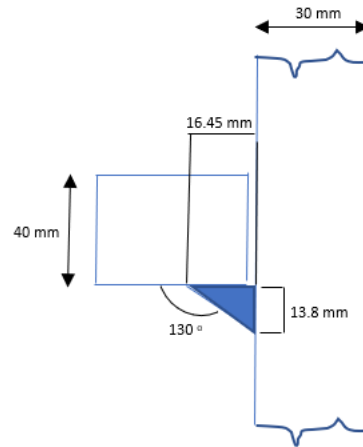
Weld geometry for a 40 mm thick flange welded to a 30 mm thick crane cylinder. The model is made with a 2 mm gap between the flange and the cylinder.
